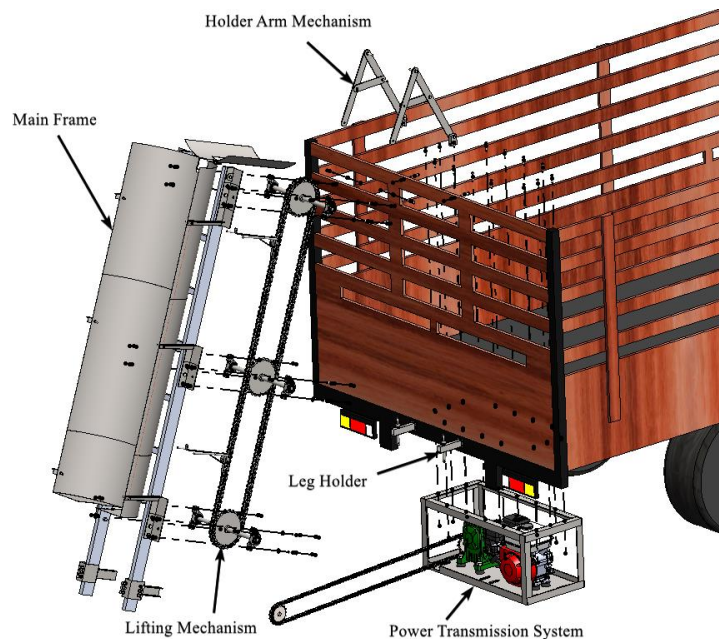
Full Assembly of Palm Fruit Lifting Device with Labelling of the Main Components
